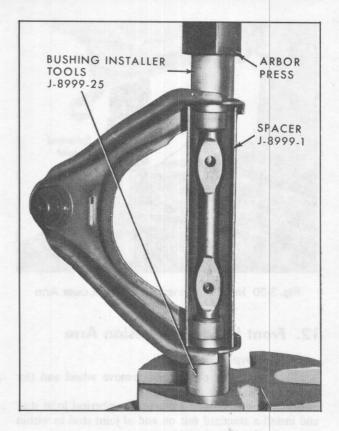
Installing Shaft And Bushing In Upper Arm
